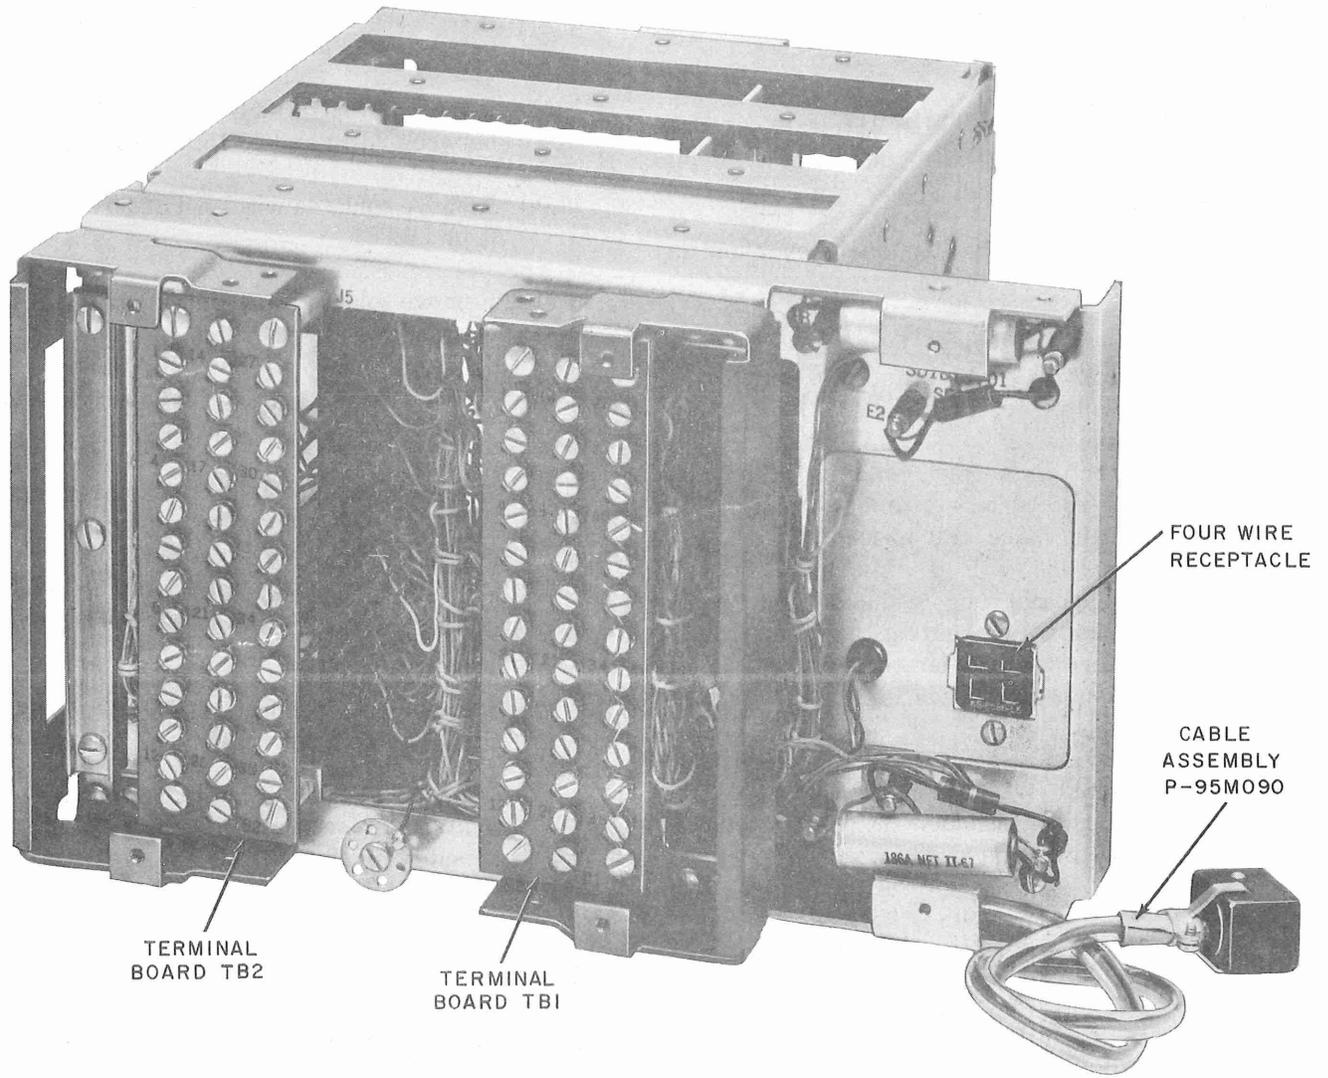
Data Auxiliary Set 824B1—Rear View (Covers Removed)
